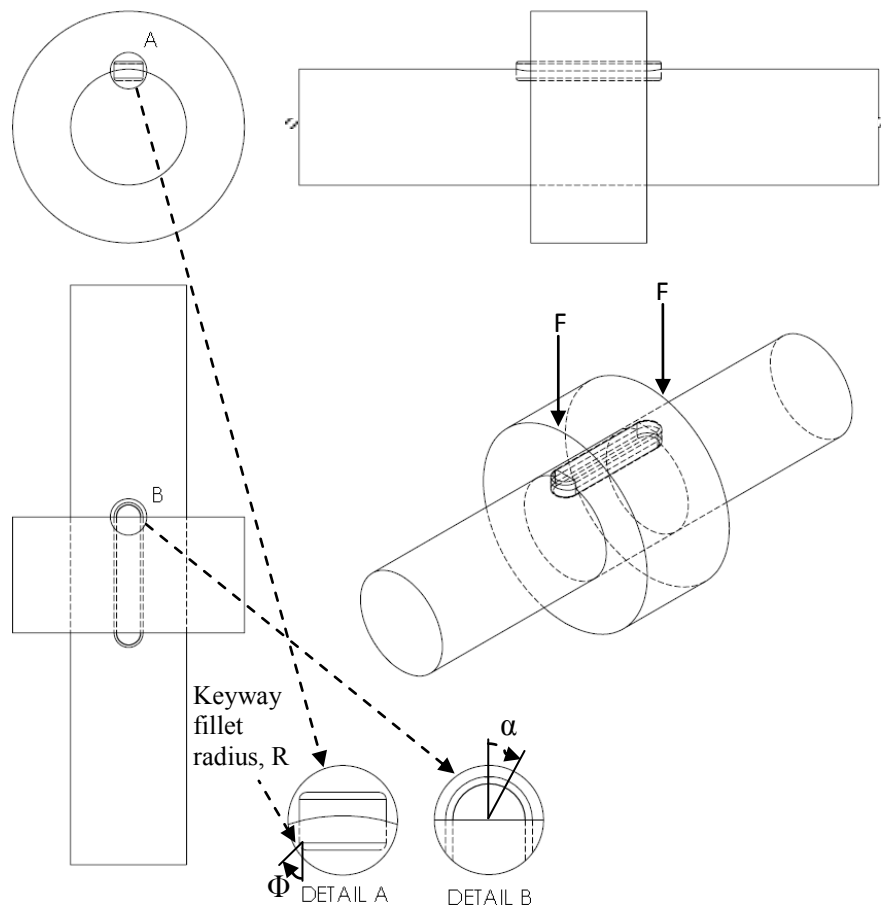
Bending model of hub, key and shaft with end milled keyway
